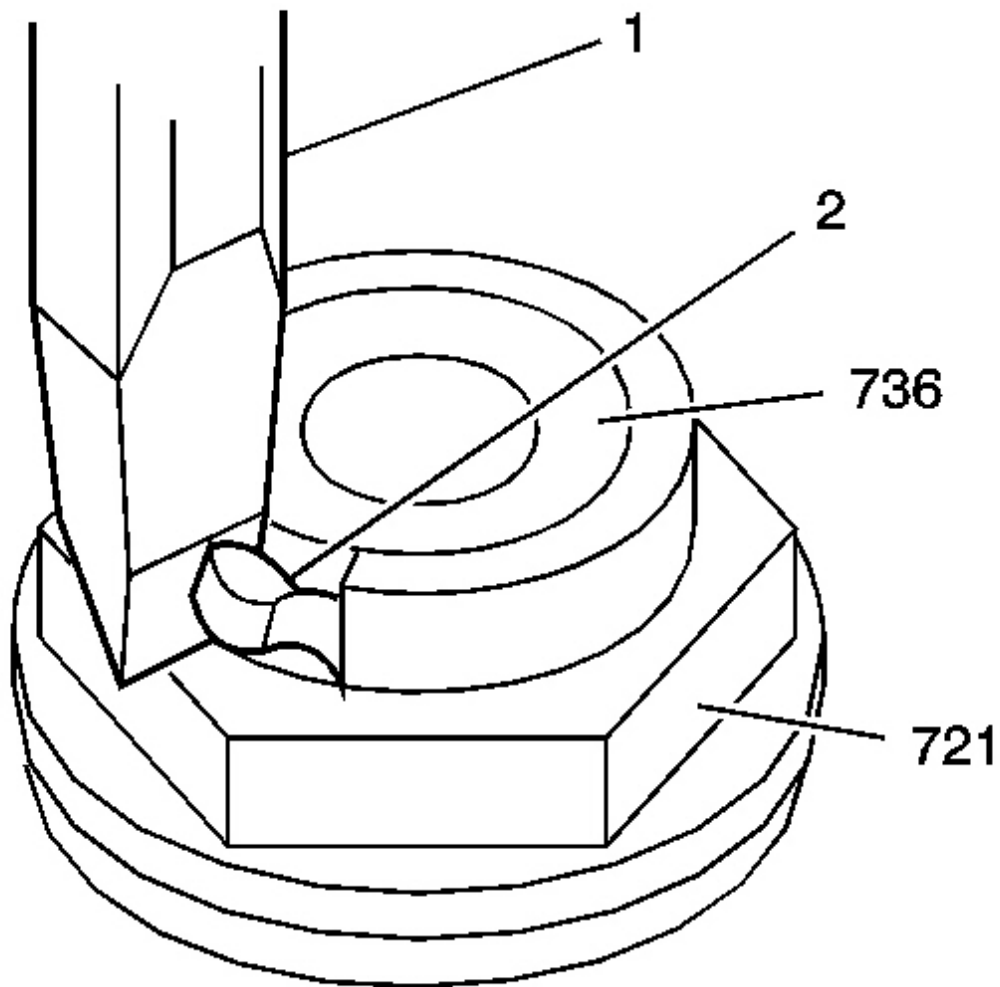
Removing The Stake Area From The 1st/2nd Clutch Shaft Retaining Nut Using A Chisel
